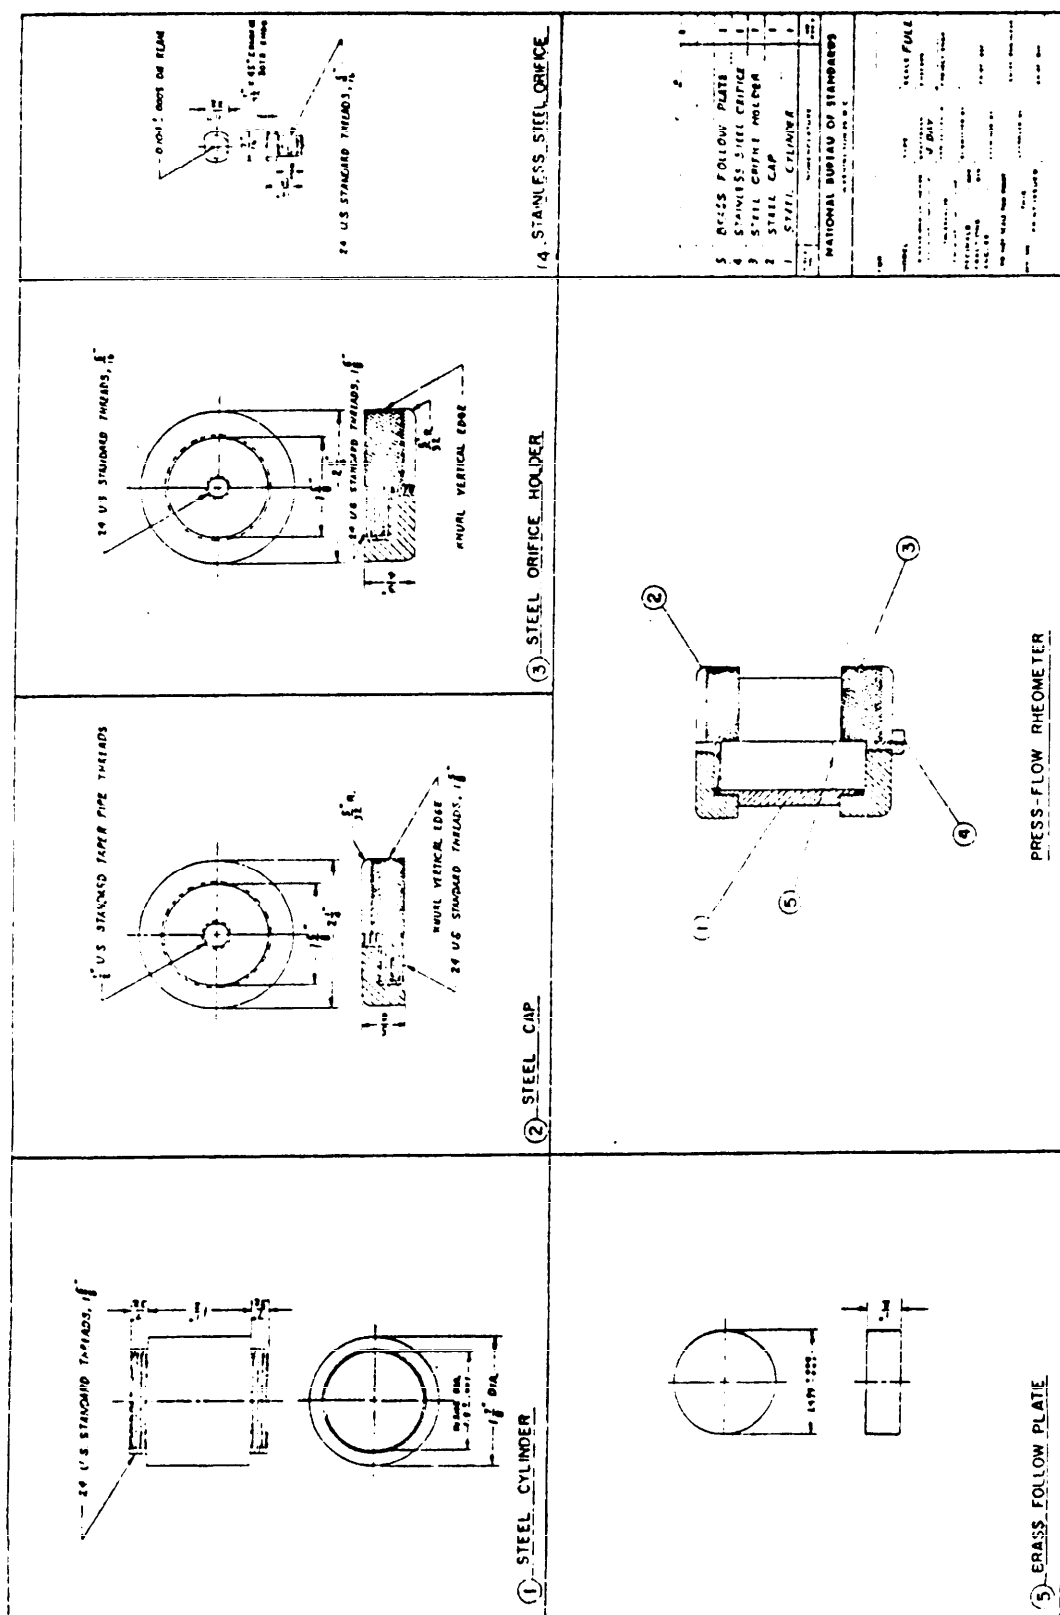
DRAWING OF PRESS-FLOW EXTRUSION RHEOMETER FOR EXTRUDABILITY TEST.
